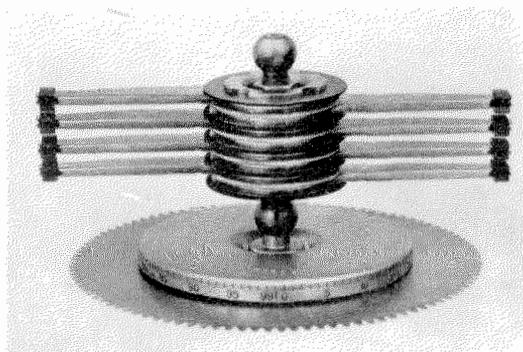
No. 7002 Finder—Assembled Brush Carriage
